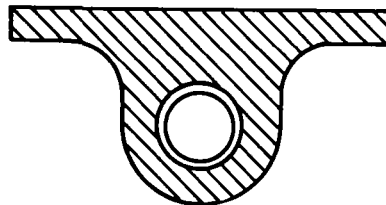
Offset Fin and Tube Configuration used in Main Radiator Design
